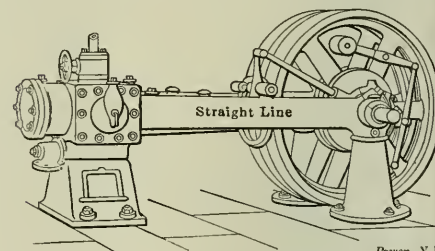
ENGINE WITH ROCKER ARM FOR CONSTANT LEAD
